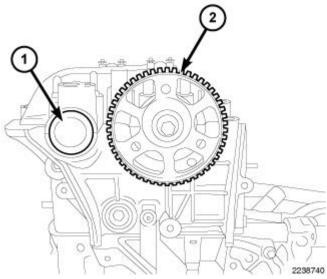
Crankshaft Sprocket Bolt Courtesy of CHRYSLER LLC
